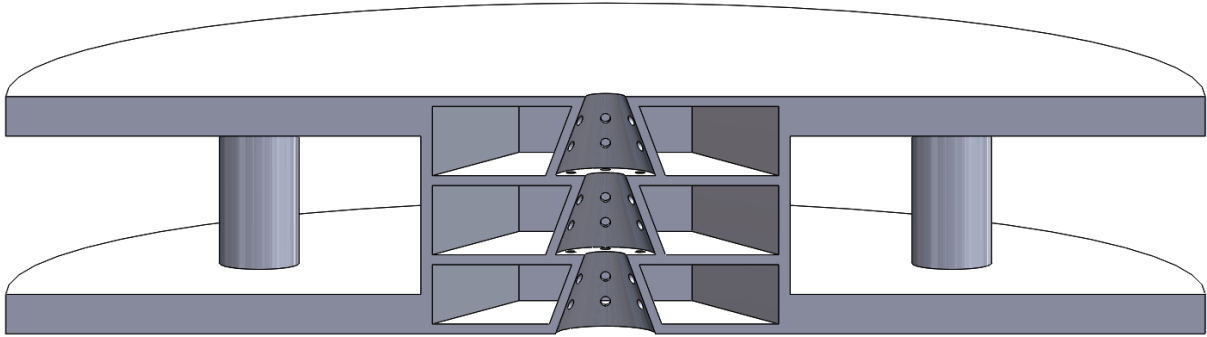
SISO - Half Inch Stages Downsizing Prototype - CAD
